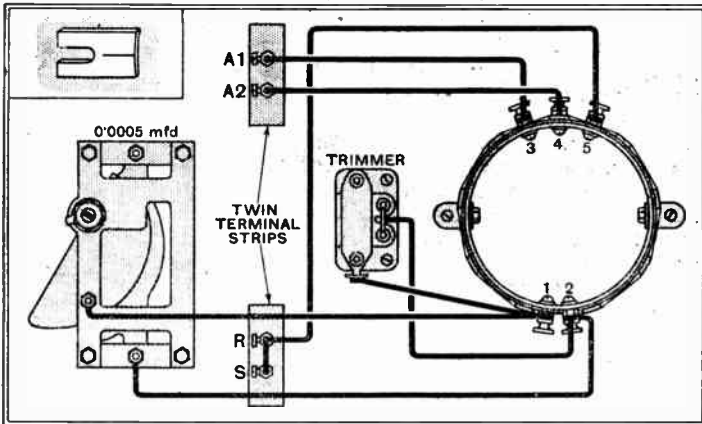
Practical wiring plan. Inset: a slip of cardboard, shaped and marked as shown, may be screwed to the front panel as a datum mark.
